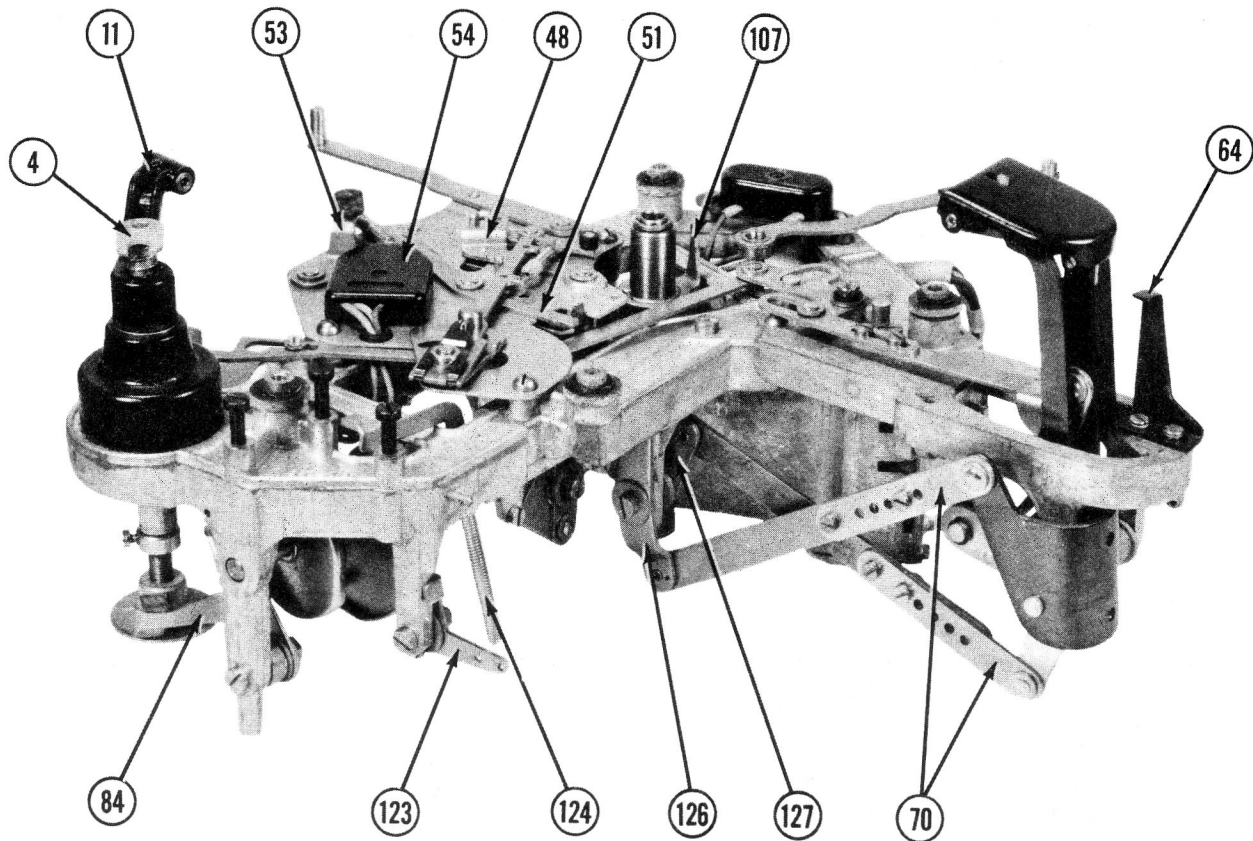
BACK VIEW—UNDER CHASSIS ASSEMBLY
